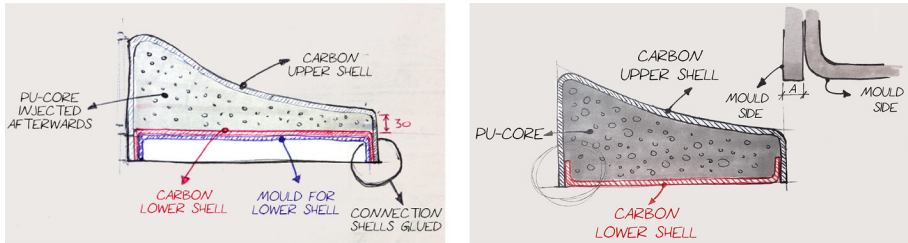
Left: section view of the first double shell structure with PU-core. Right: section view of second version.
